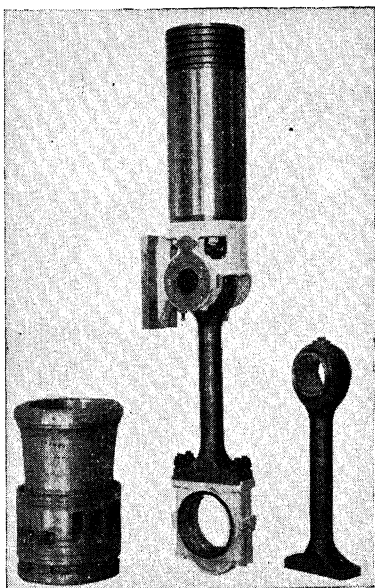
Piston, attached cross-head, connecting rod, and cylinder liner for large Diesel engine. (Courtesy Nordberg Manufacturing Company.)
